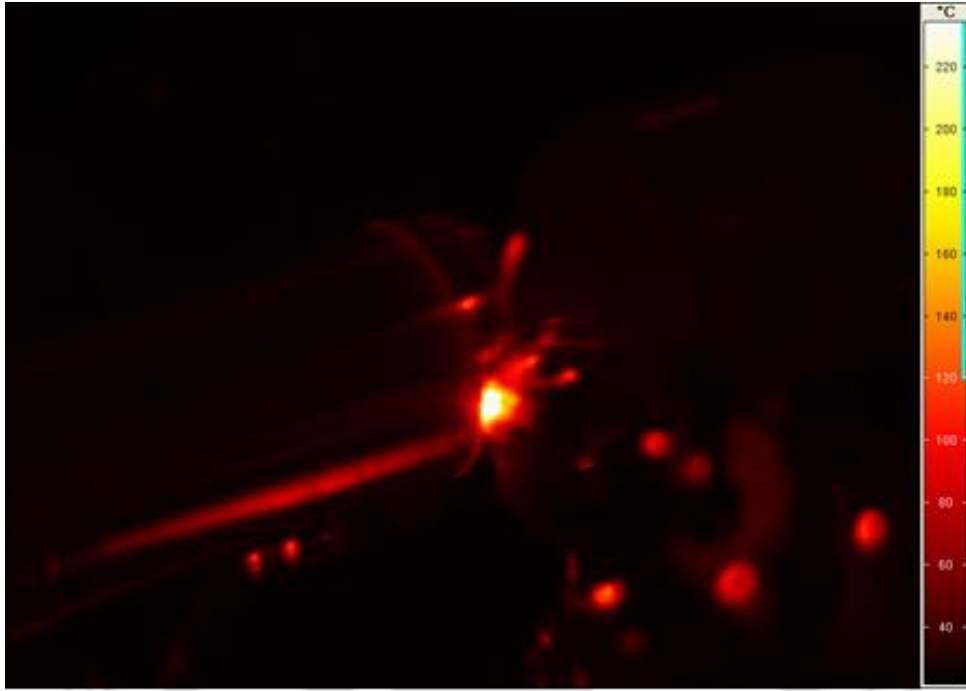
Thermogram of mild steel workpiece during cutting (120 m/min cutting speed, 0.24 mm/rev feed, 1 mm depth of cut and 10 mm distance between cutting tools)
